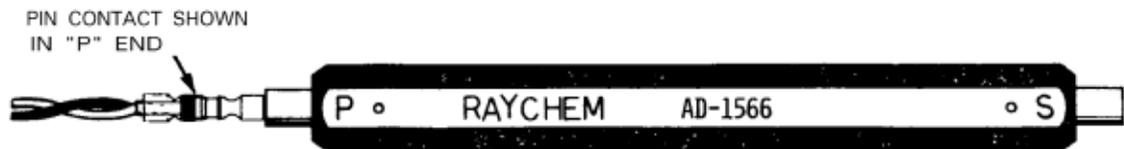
Contact Inserted into AD-1566 Repair Holding Fixture
